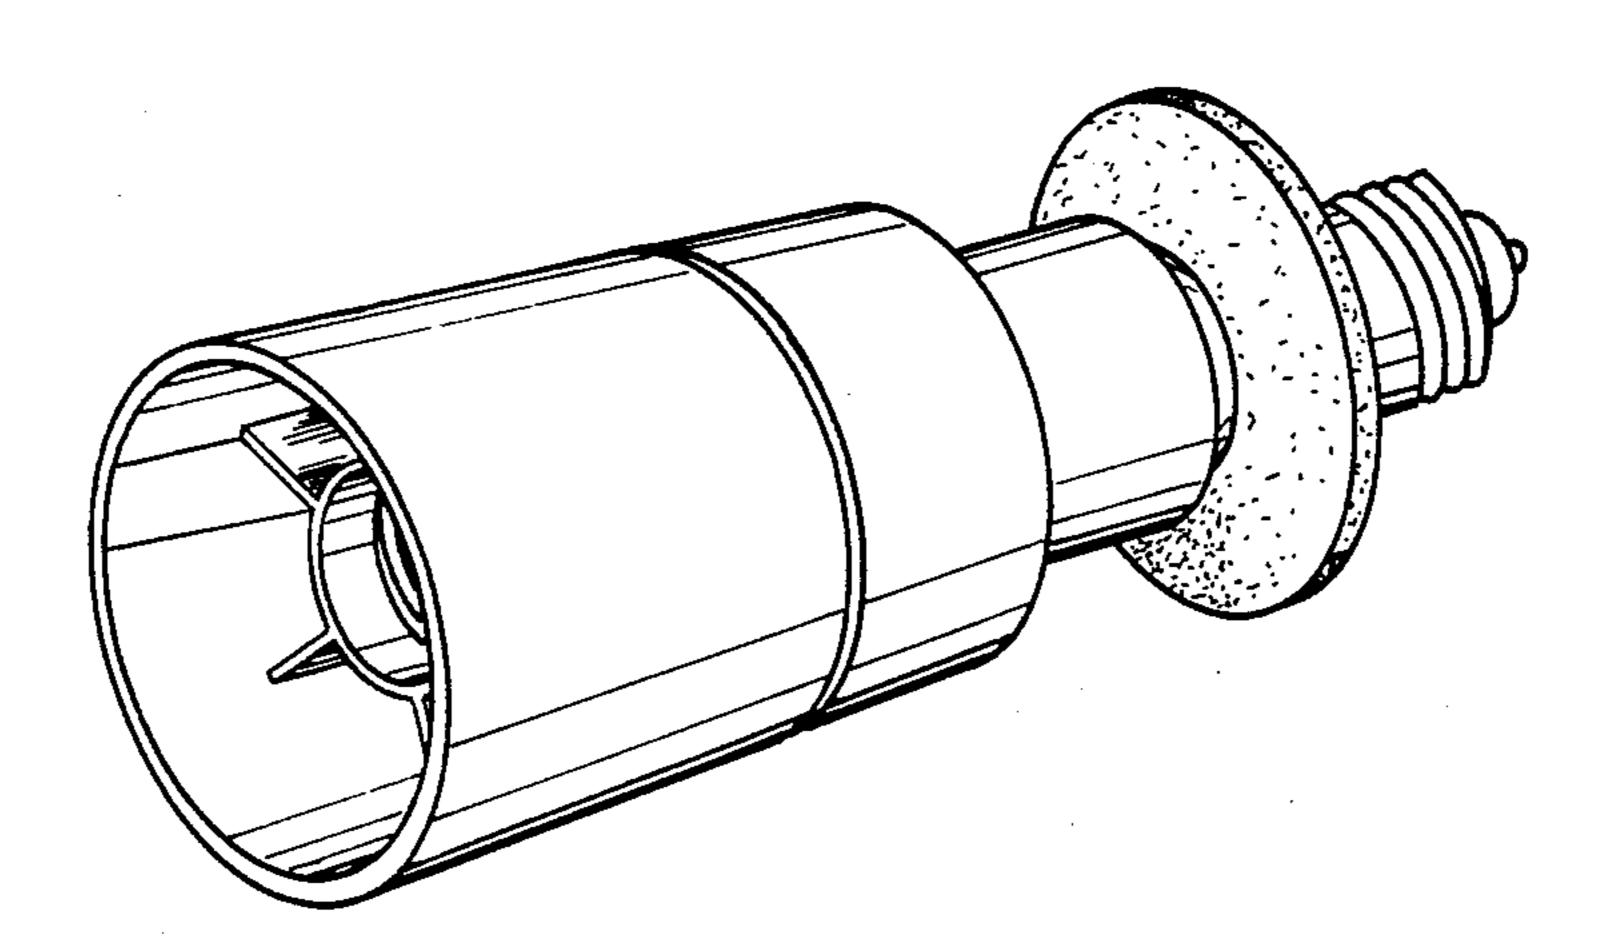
is a front elevational view of a light socket mounted remote controlled light switch showing my new design, the rear elevational view being a mirror image.
